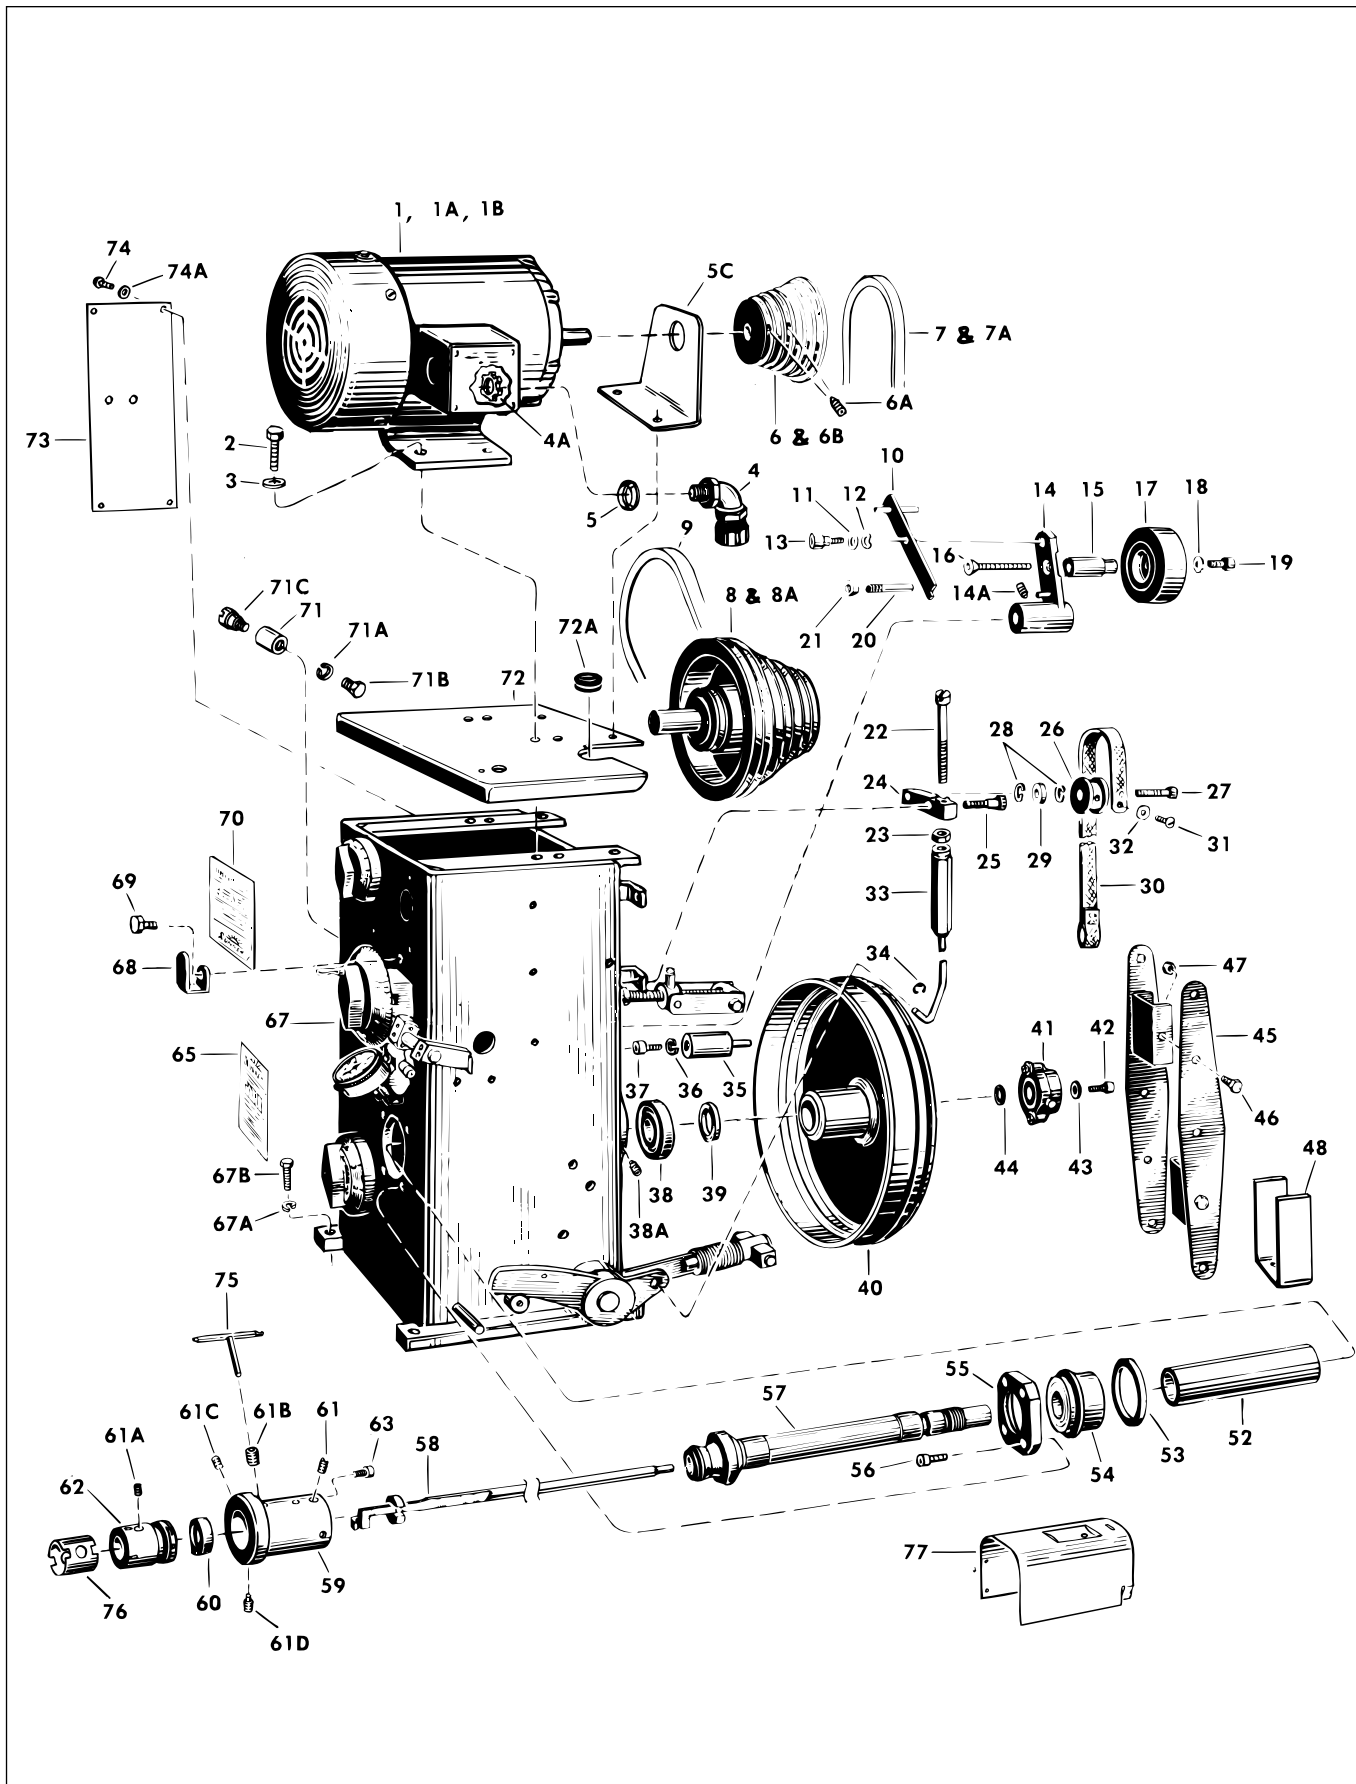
FIGURE A - HONING MACHINE HEAD & MOTOR ASSEMBLY
